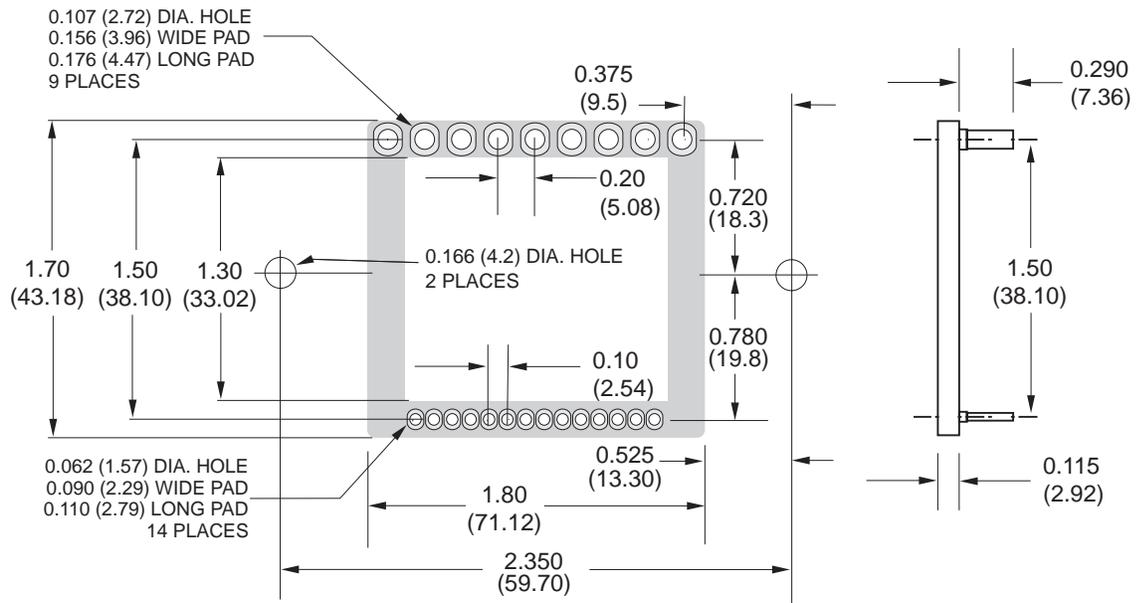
PCB Hole Pattern (for Mounting of the PR-22 Pin Receptacle Carrier)
